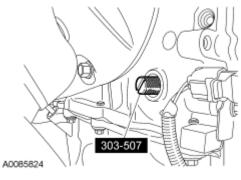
Identifying Special Tool Courtesy of FORD MOTOR CO.
